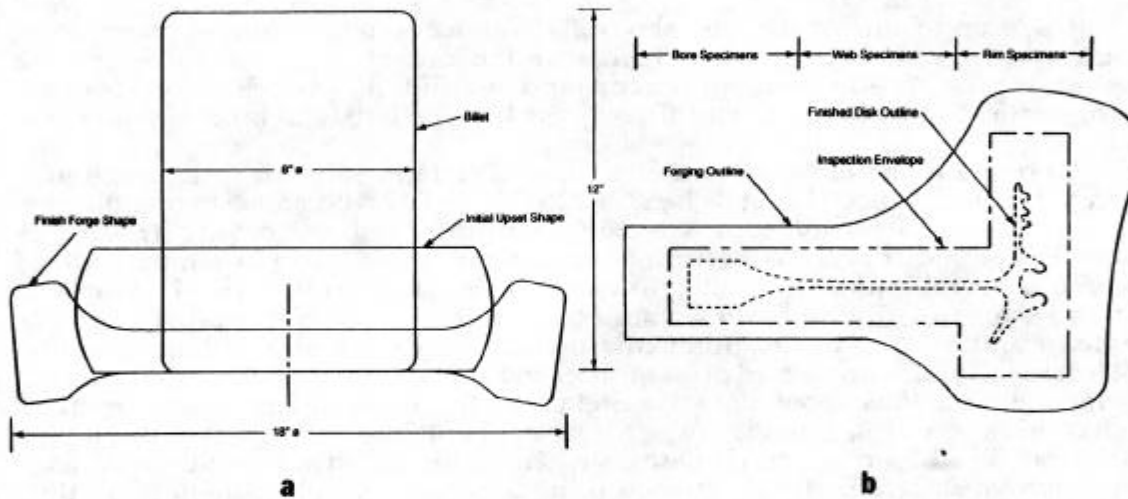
Schematic drawing of (a) compressor disk two step forging process and (b) finished part and inspection envelope within the forging cross section.
